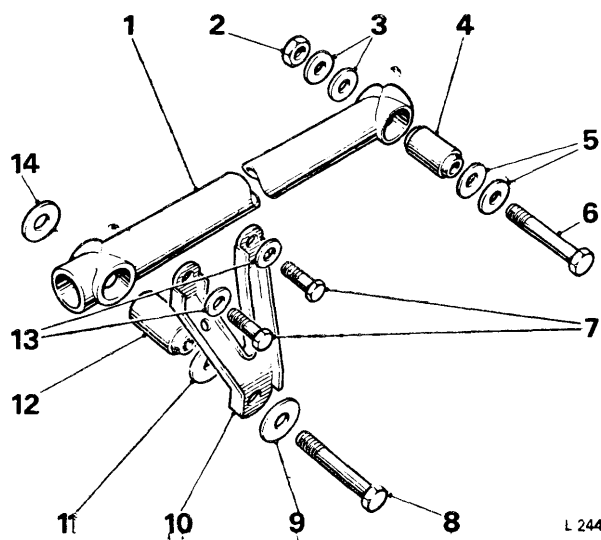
EXPLODED VIEW—TUBULAR LINKS
